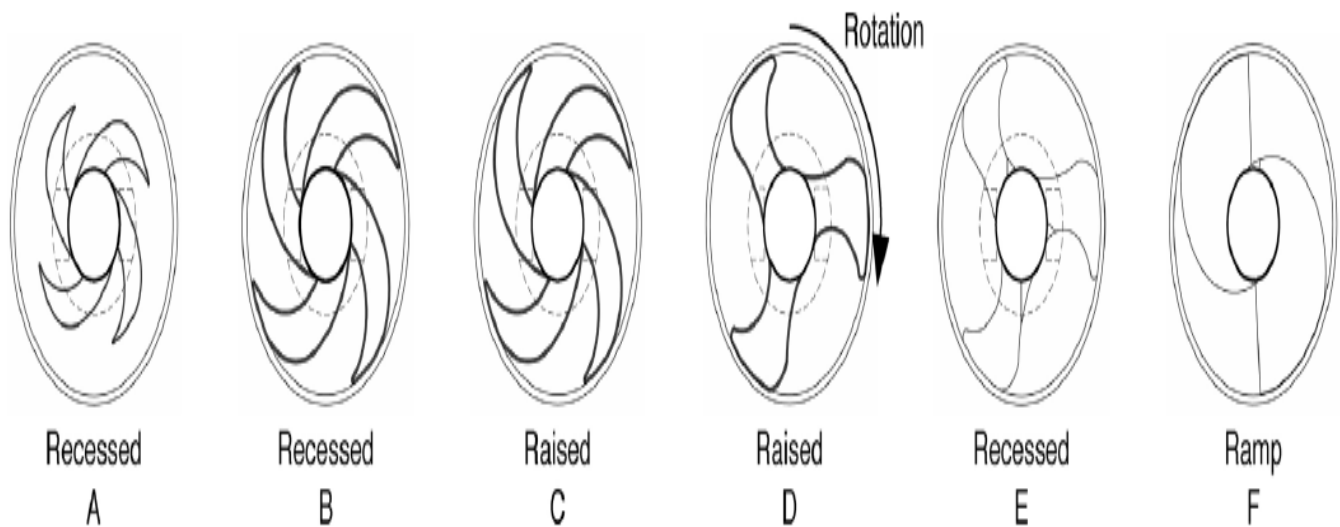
Different tool shoulder geometries (Trueba Jr et al. 2015).
